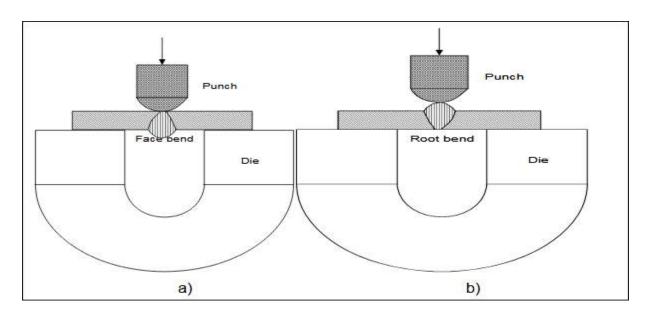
Schematics of guided bend tests a) face bend and b) root bend
